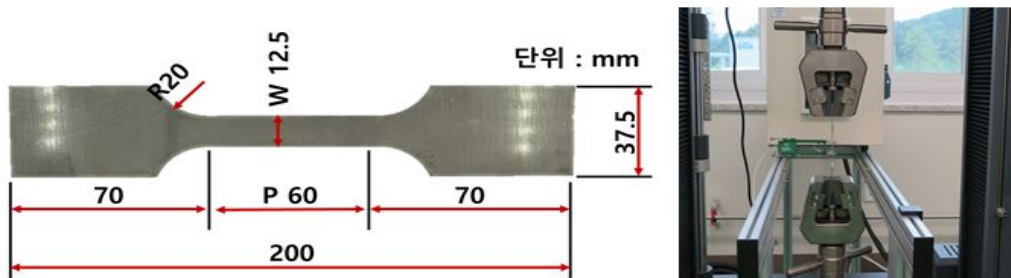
KS B 0801 13B tensile specimen dimension and tensile test
